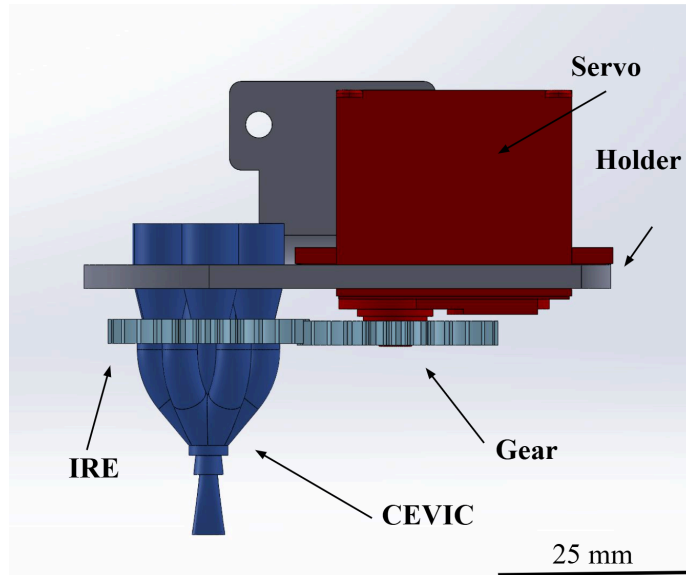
3D model of assembled servo motor, gear, IRE, and CEVIC in holder
